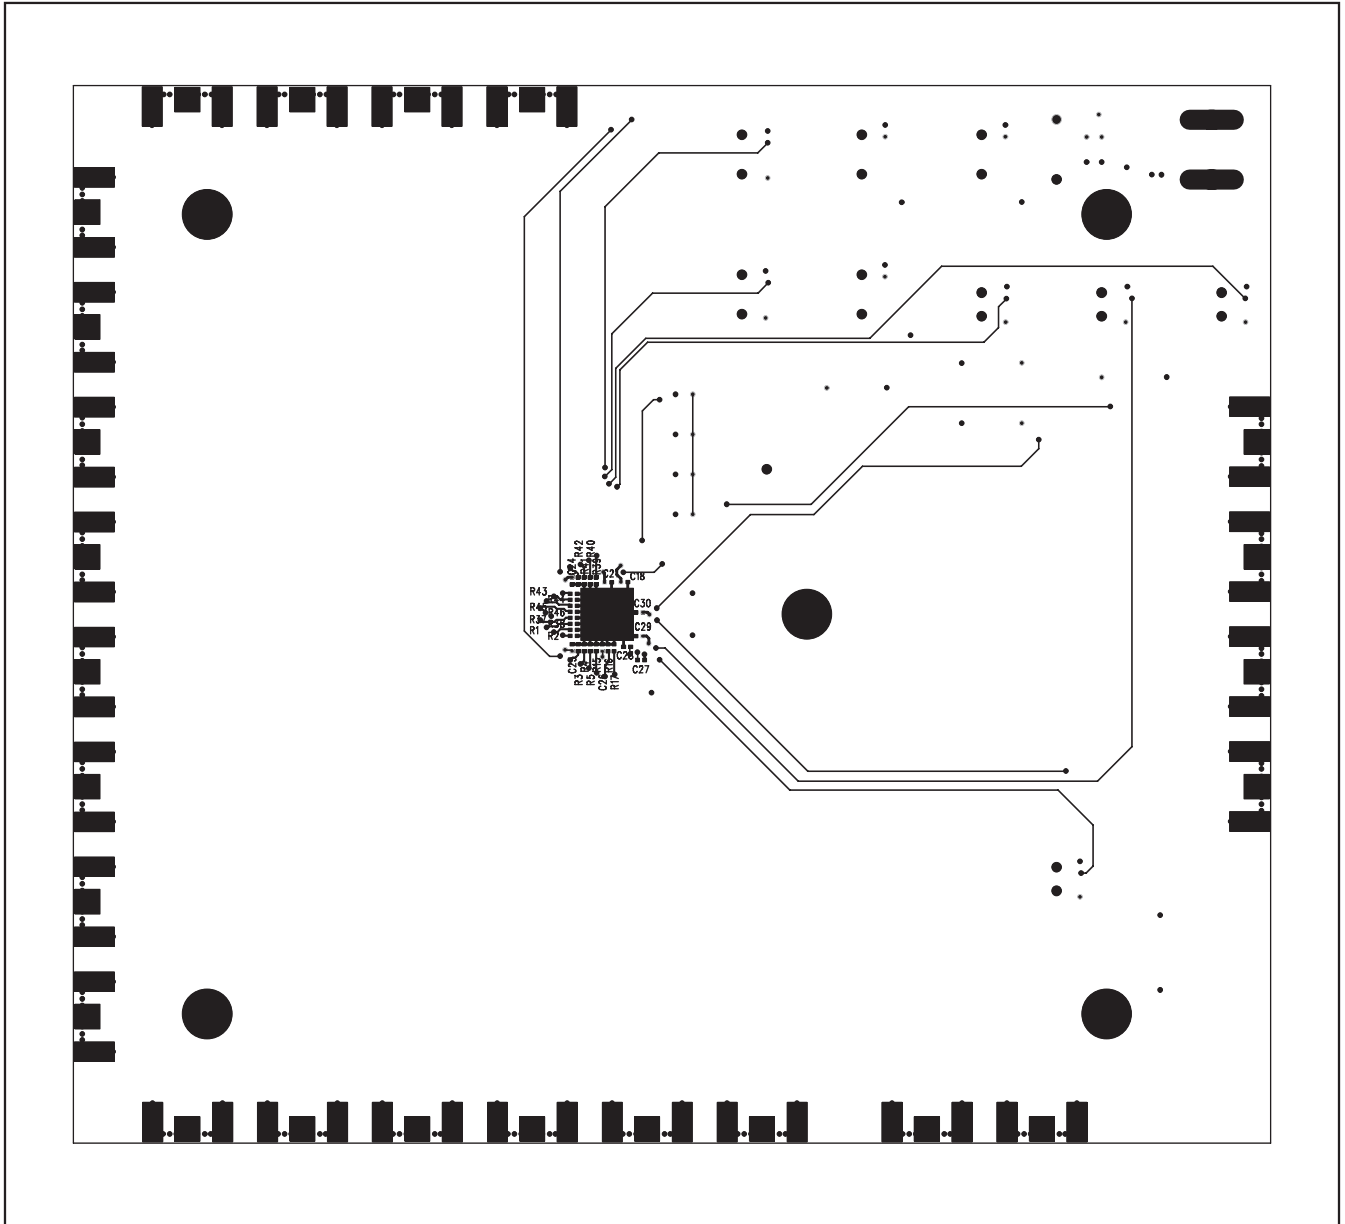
MAX3678 EV Kit Component Placement Guide—Solder Side
